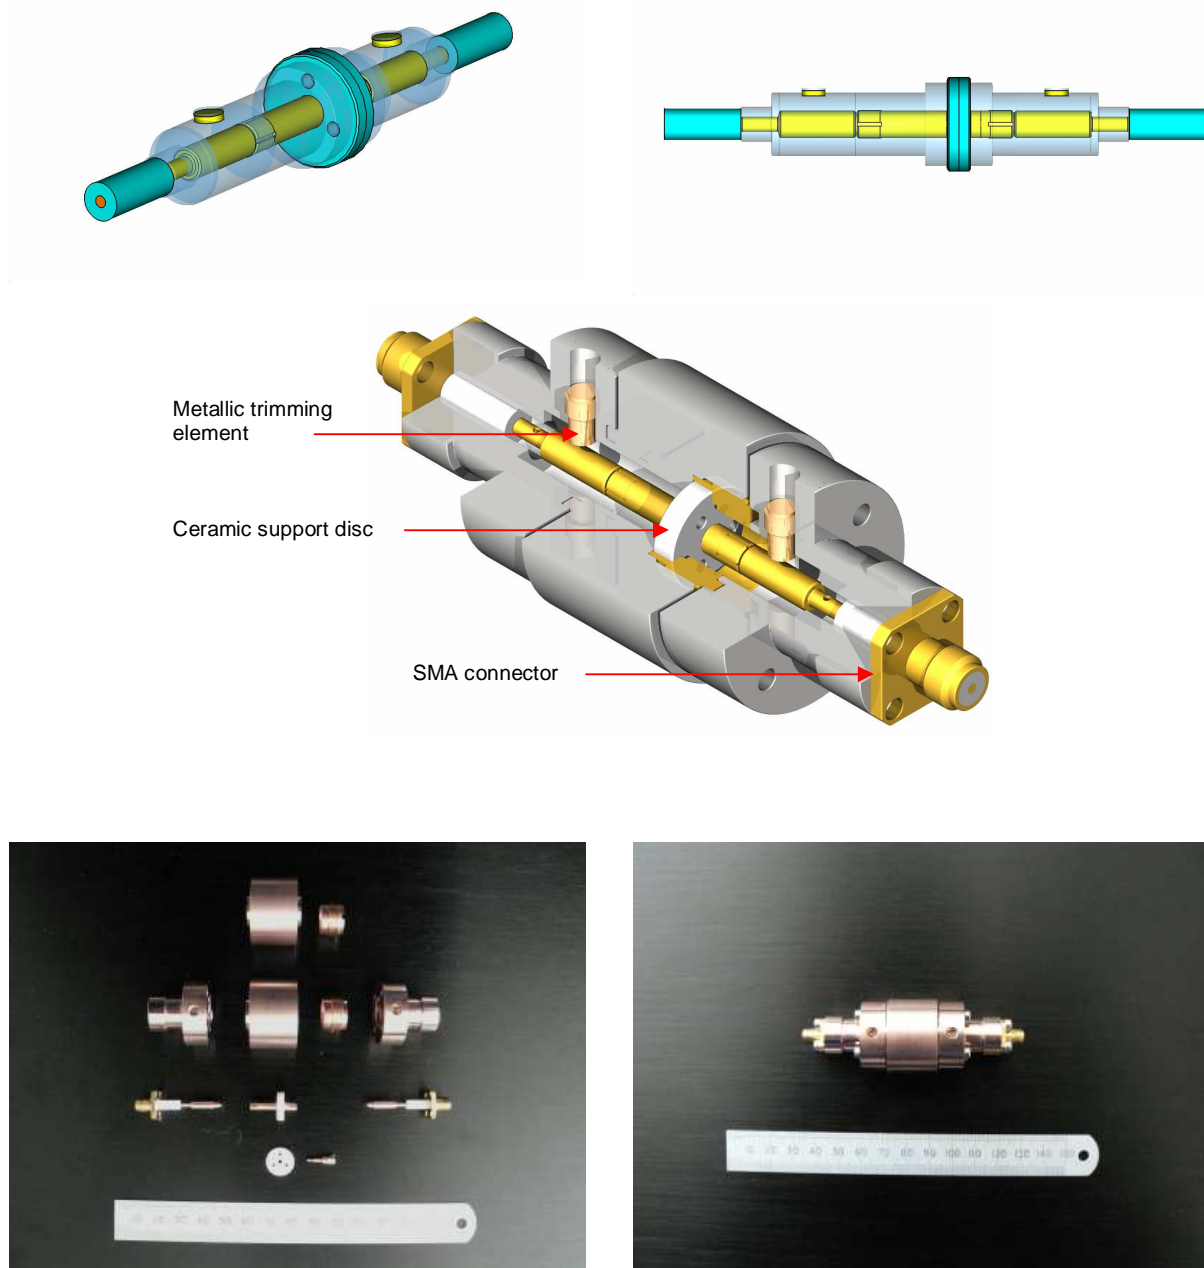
Coaxial test assembly / HF model / 3D CAD view / Photographs
